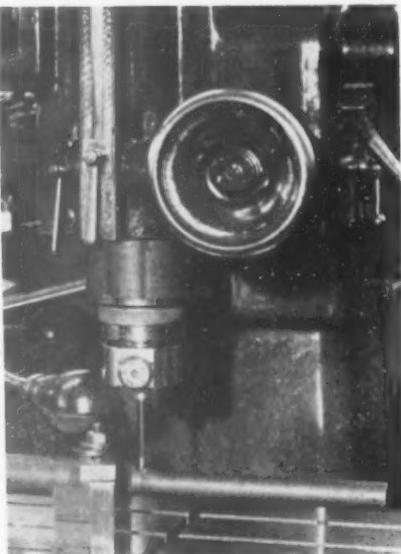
, right—The machine spindle is located exactly over the work-piece for boring hole specified in Fig. 7. Locating time: 1.5 minutes. Allowed tolerances: .001-in. Actual tolerances: .0001-in.
